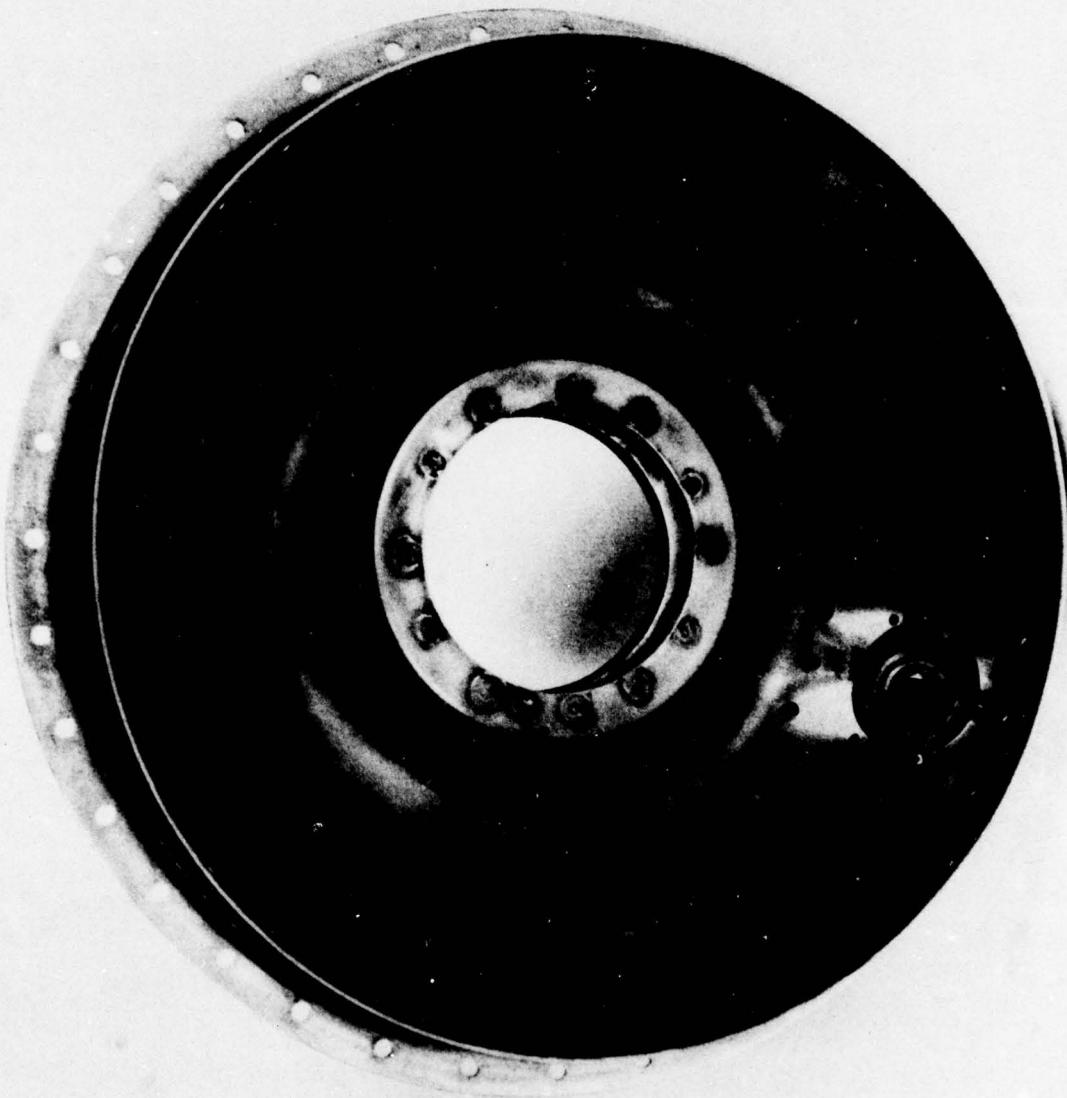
WR33 Diffuser and Combustor Cover - P/N 650 (View 2)
